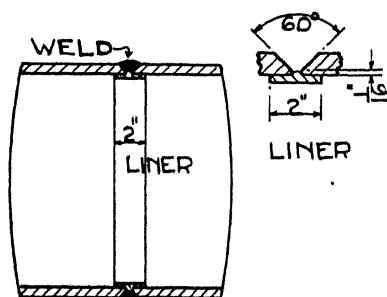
Plain end joint with liner, used for gas lines as large as 24 in. Two welding beads are required.
